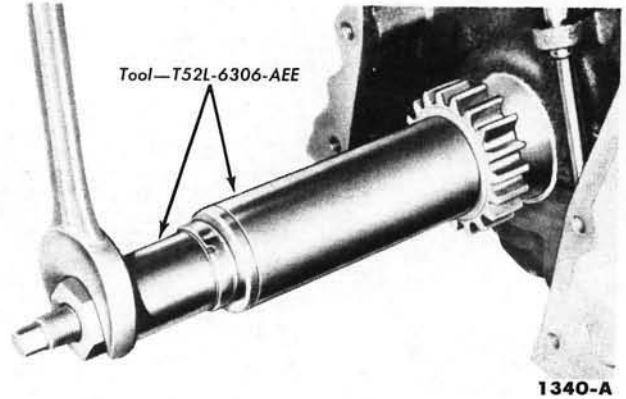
Crankshaft Gear Installation—302 or 332 Engine
